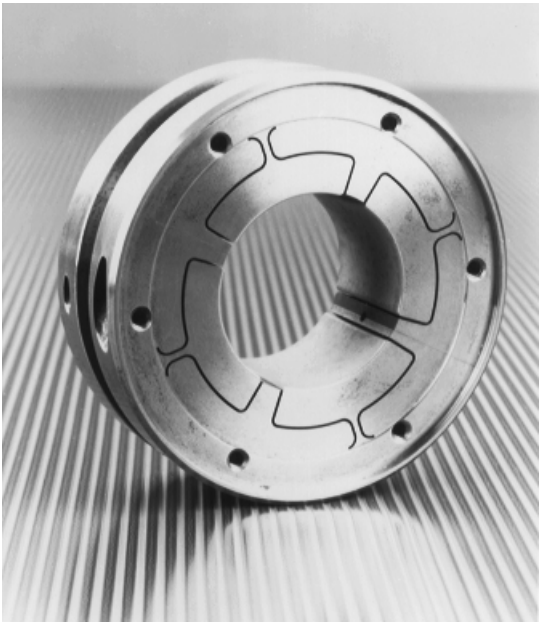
Radial Flexure Pivot tilt pad bearing, split design. (*Bearings Plus, Inc., Houston, TX.*)
